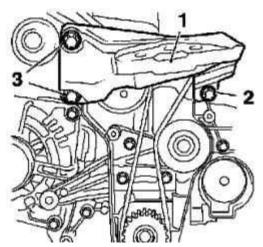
Mounting right support damping engine block: 1 - right bearing damping block, 2, 3 - bolts fastening
